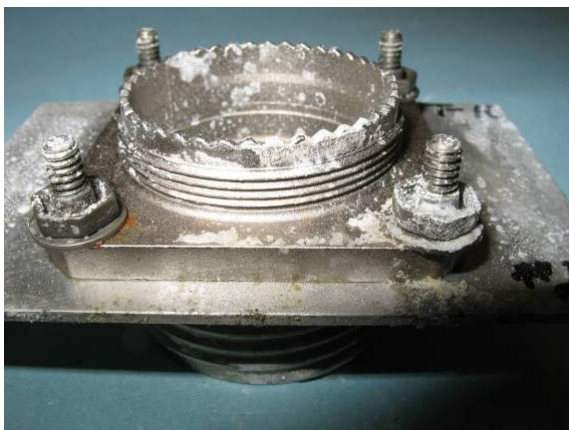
Connector Fastener Corrosion in test rig
